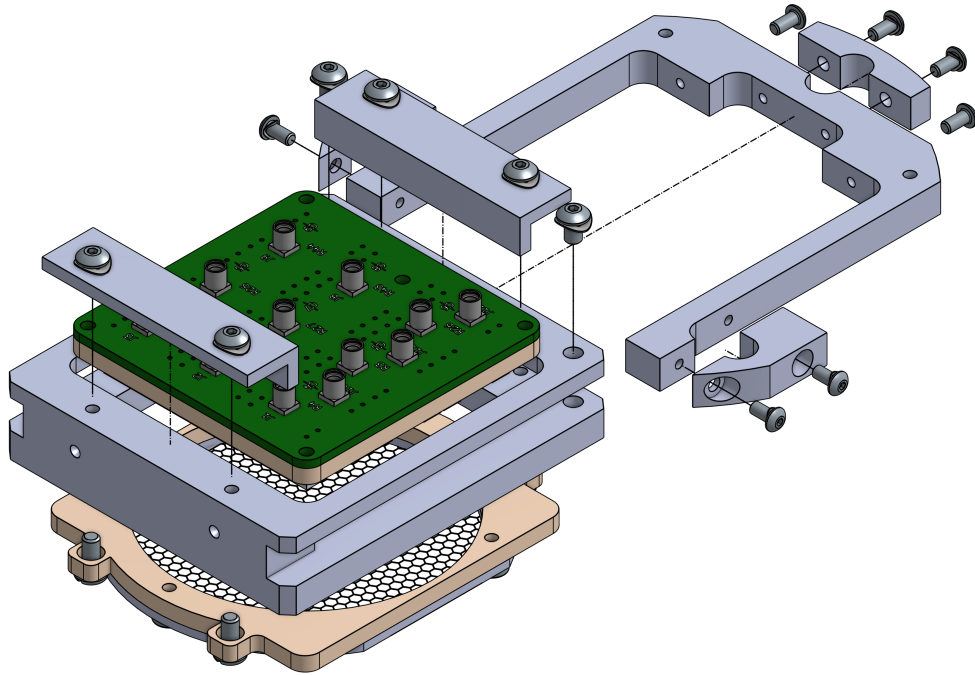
Exploded view of the SiPM bracket and tray assembly. The tray is in the foreground, and has a cutout in the center that accepts the SiPM array and PEEK array spacer. Two L-shaped brackets on opposing ends of the tray are screwed into place, capturing the SiPM array. Two additional holes at the rear corners of the tray are designed to be concentric with tapped holes in the bracket so the tray can be securely mated to the bracket. The bracket is in the background and shares a similar design as the previous iteration. Two new holes in the same plane as the holes for the rear mounting clamp are included as optional electrical ground points at the corners of the bracket. Cutouts for the forward mounting posts on the bracket were intentionally asymmetric so the bracket alone could be installed by sliding it laterally onto the mounting posts. Through holes were used in all cases to ensure the absence of any trapped volumes.
